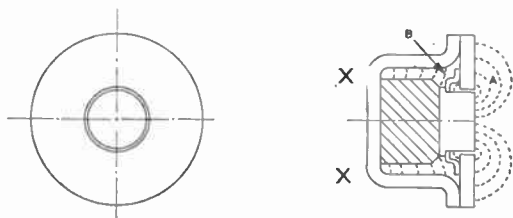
A typical permanent magnet loudspeaker assembly using a central pillar type magnet.
